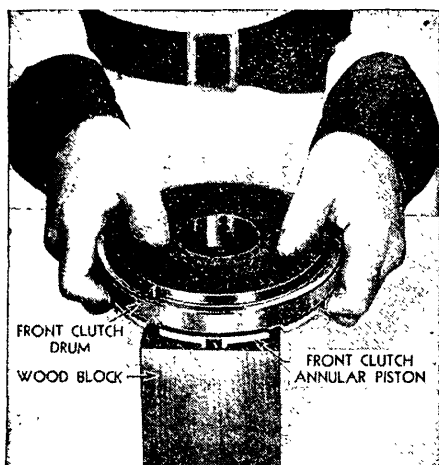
Remove front clutch annular piston from clutch drum by bumping front face of center gear on wood block. Then remove inner and outer clutch release springs from front drum. Take out composition and steel clutch plates
